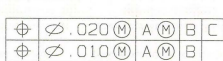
Positional Tolerancing Using Two Single Segment Control Frames
